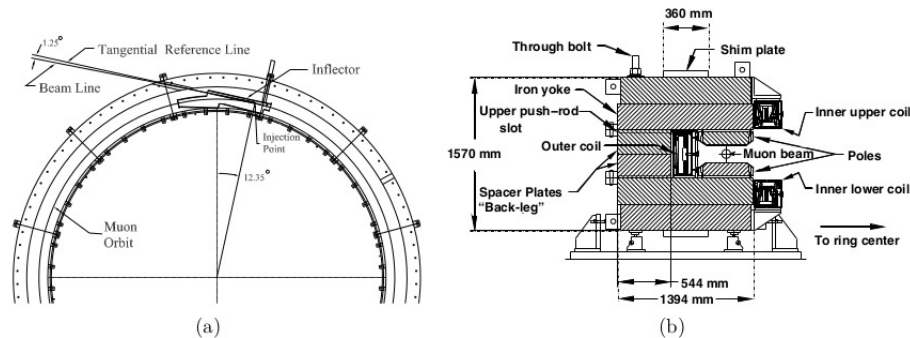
(a) Plan view of the beam entering the storage ring. (b) View of the storage ring cross section.
